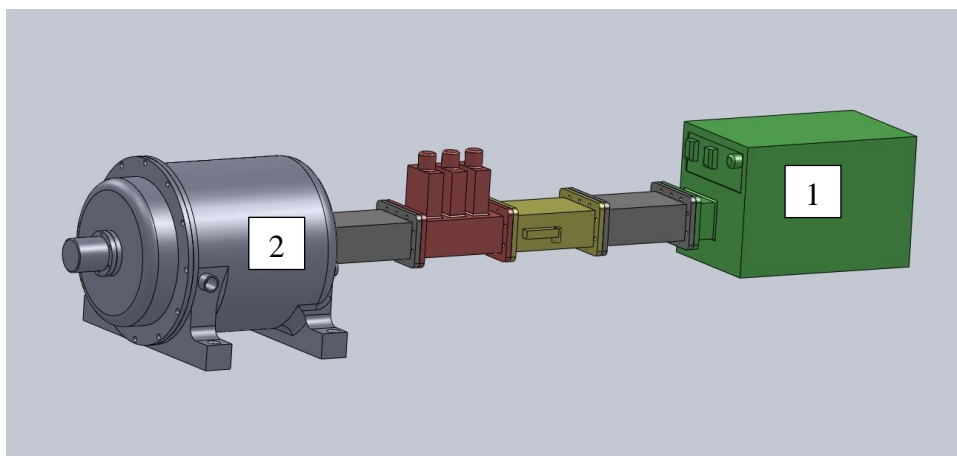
3D model of the waveguide line with magnetron head (1) and vacuum chamber equipped with a rotary drum inside (2)
